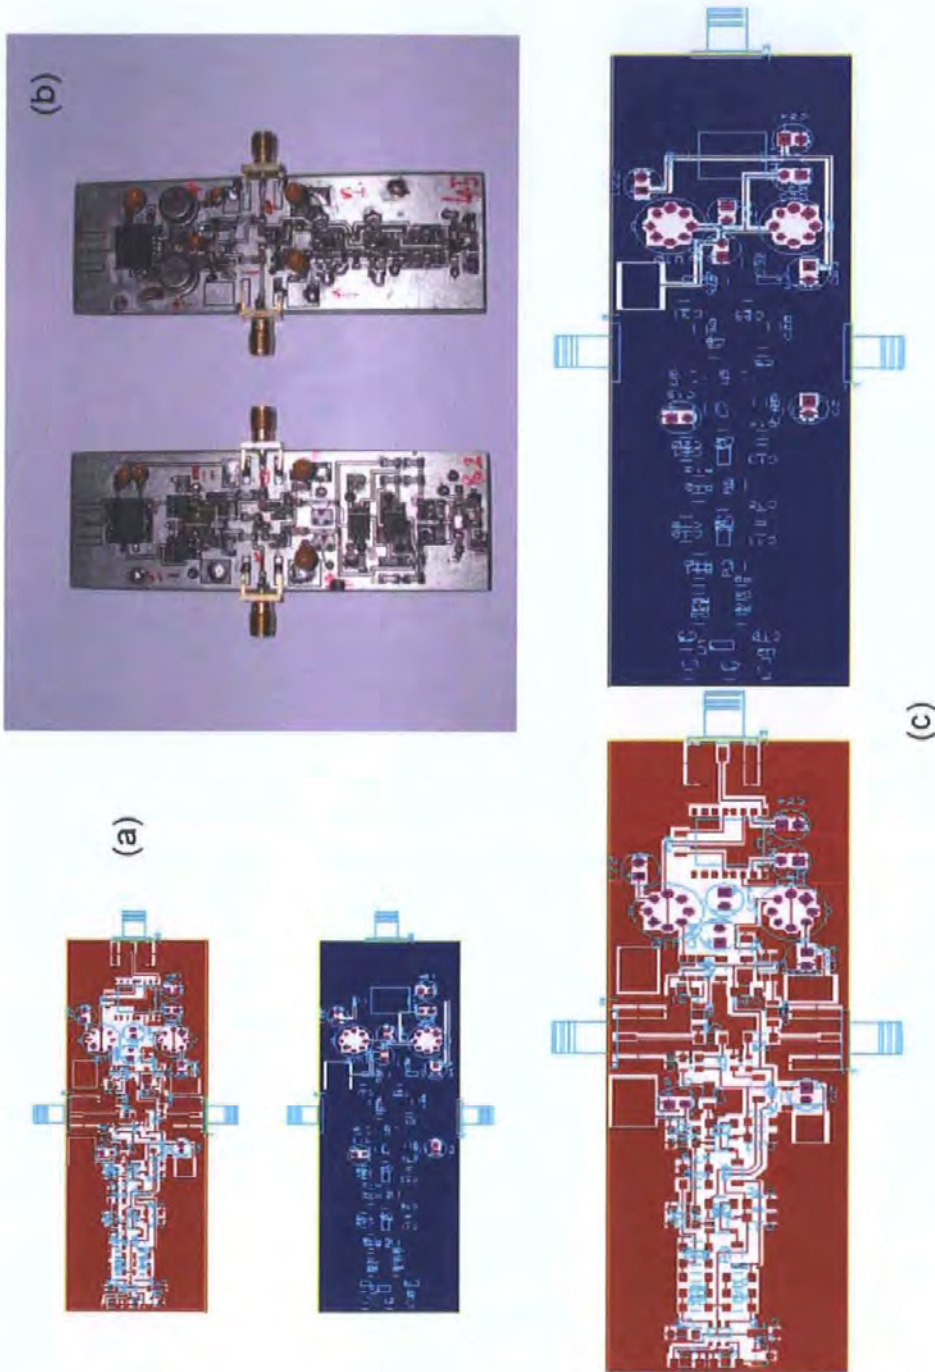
Differential sensors PCB layout (a) actual size (b) completed circuits, (c) detailed PCB illustration top and bottom copper views.
